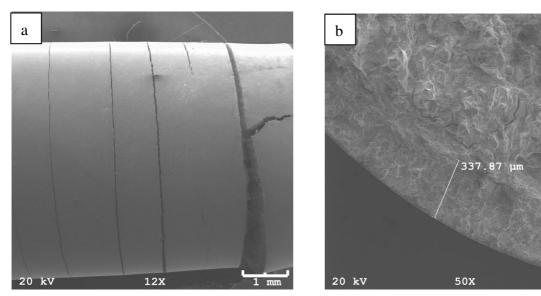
SEM photos of fractured PH-42 Supra steel plasma nitrided tensile test specimen: a) surface cracks and b) fracture surface showing the plasma nitrided layer thickness of 337.87μm.
